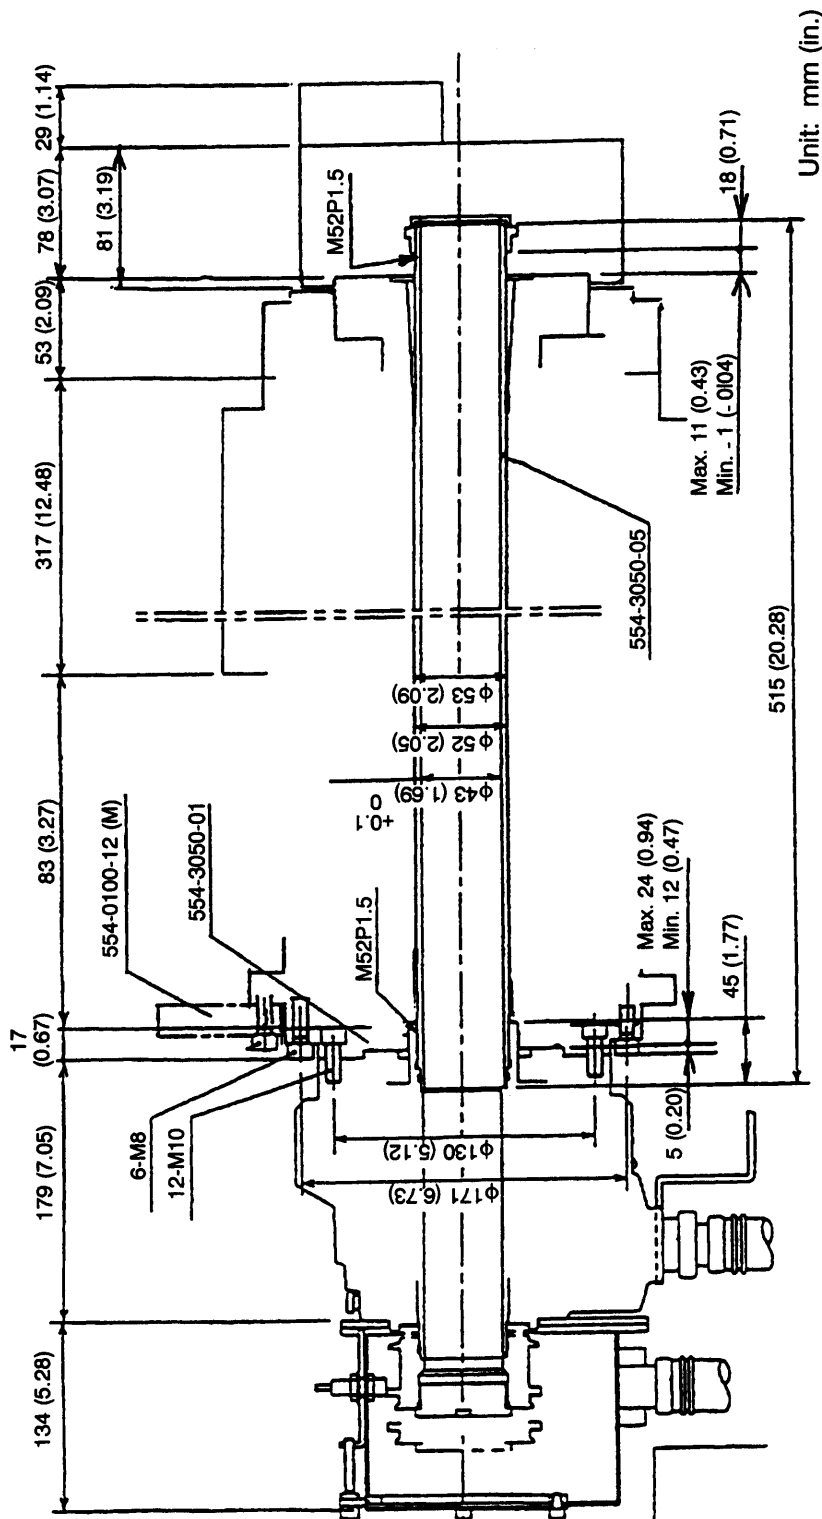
Chuck Mounting Drawing - Solid Chuck
